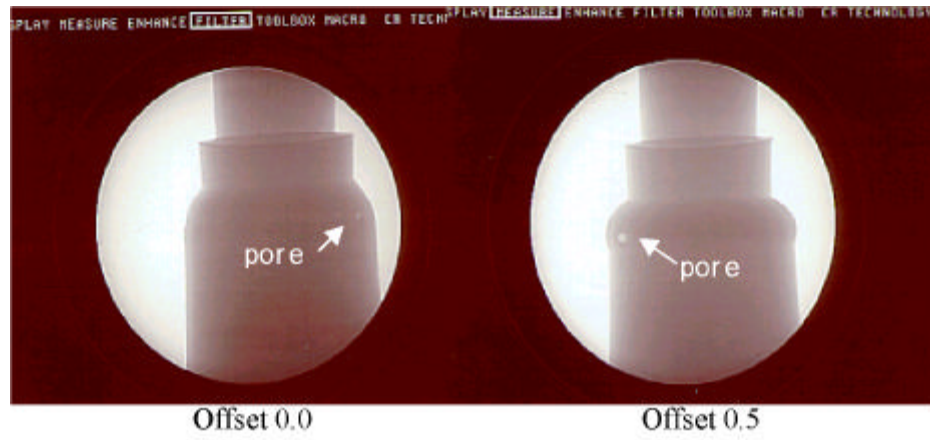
X-ray radiography image with different beam position in weld of end plug
